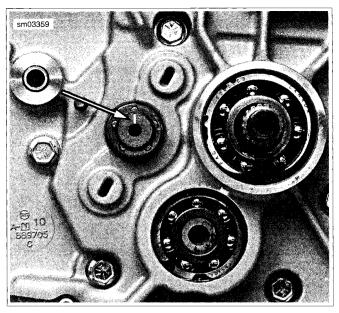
Scribed Line on Shifter Drum at 12 o'clock
